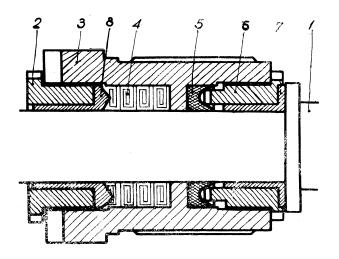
RECOIL BRAKE FRONT STUFFING BOX ASSEMBLY
